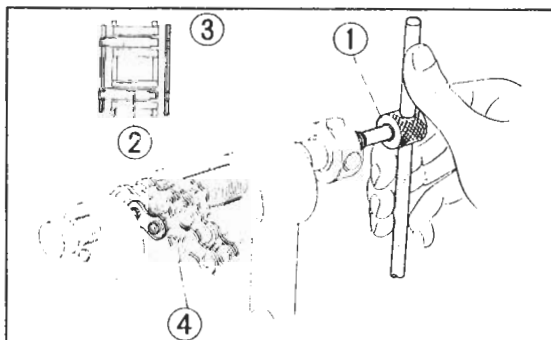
① Pressure bolt B ③ Joint plate
